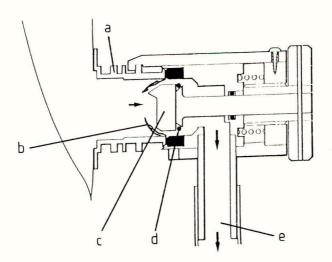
Pack coupler: (a) pack spout; (b) foil seal; (c) foil cutter; (d) self sealing valve; (e) outlet.
